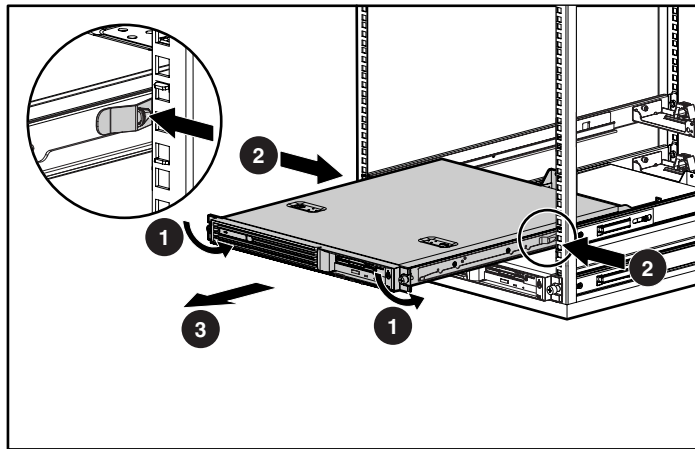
Disengaging the rail-release latches (cables removed for clarity)
